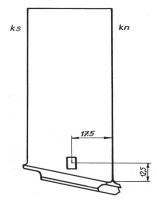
Location of tensometric gauge on a 1st compressor stage rotor blade
